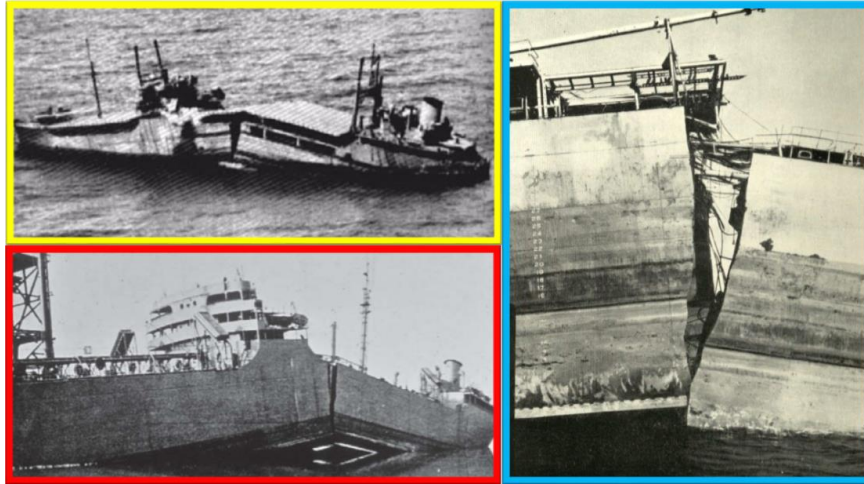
Brittle fracture caused in Liberty Ship, yellow box- top view, red box- side view, blue box- fracture at cant angle
